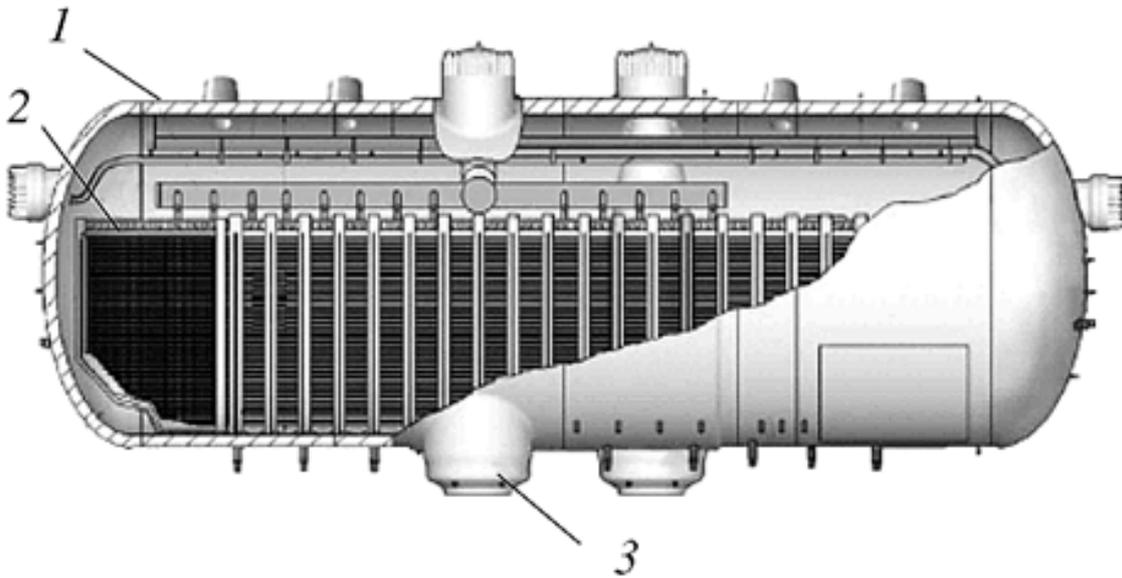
PGV-1000MK steam generator: 1) housing; 2) tube bank; 3) coolant inflow and outflow stub pipes (figure from Ref. [154]).
